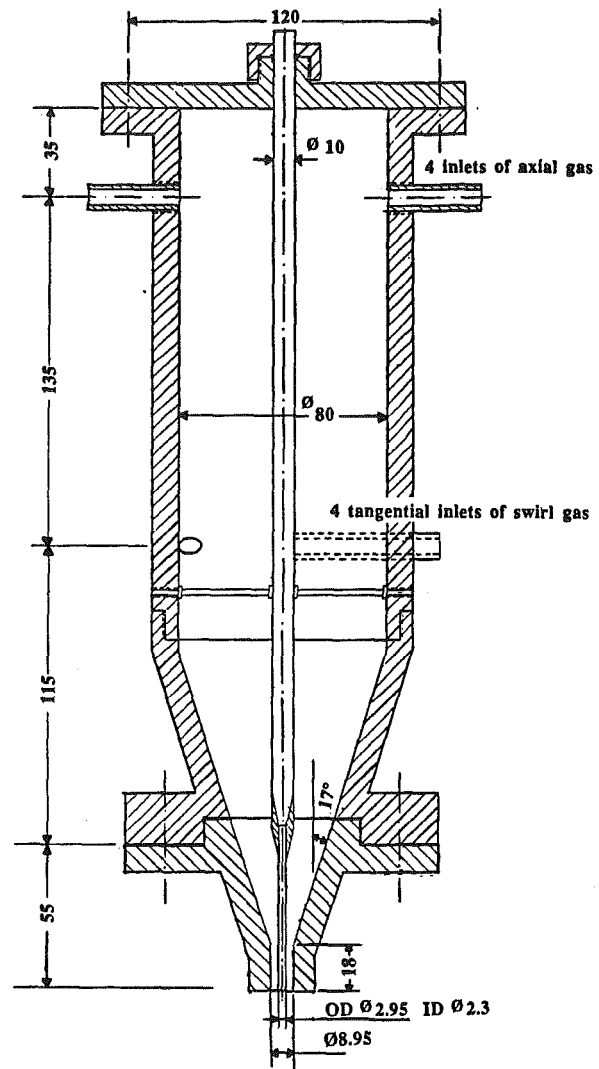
Geometry and main dimensions of the single coaxial atomizer with 8.95 mm diameter of the air jet
